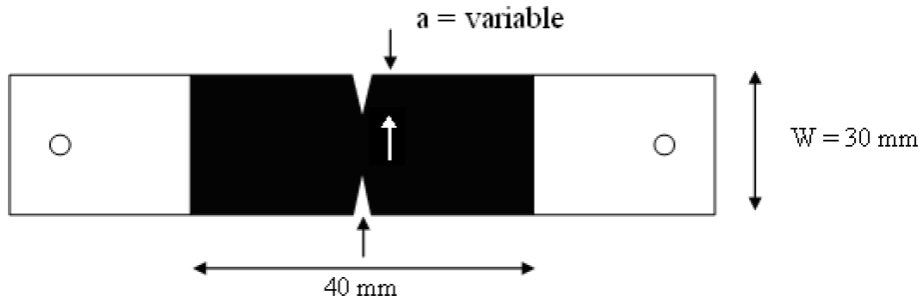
Double Edged Notched Tension (DENT) Test Specimen
